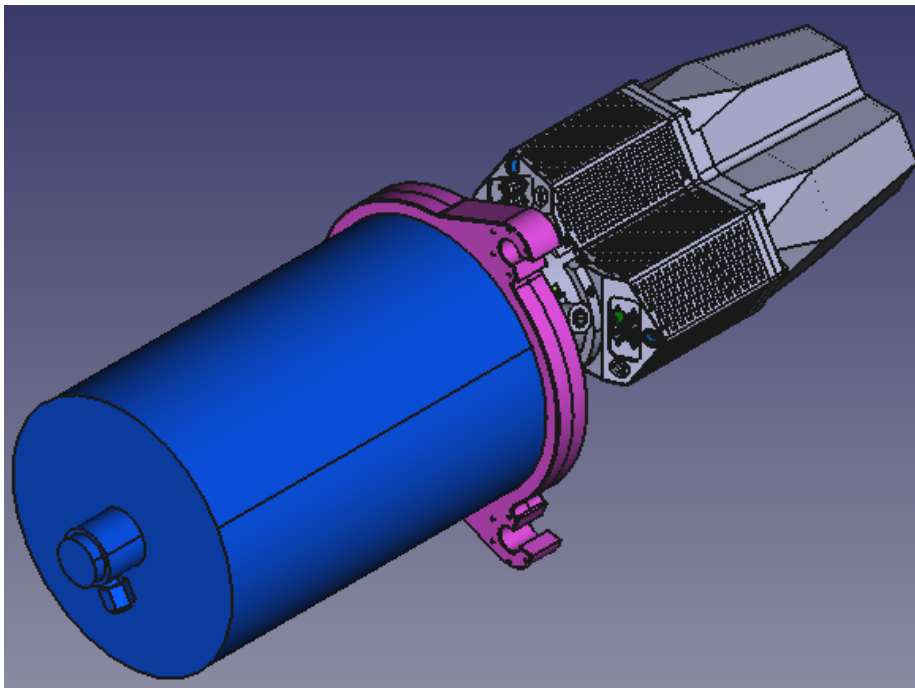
The Miniball cluster with its mounting ring. The pink ring is mounted onto two rods and then fixed. The pink part is equivalent to the pink part of figure 15.
